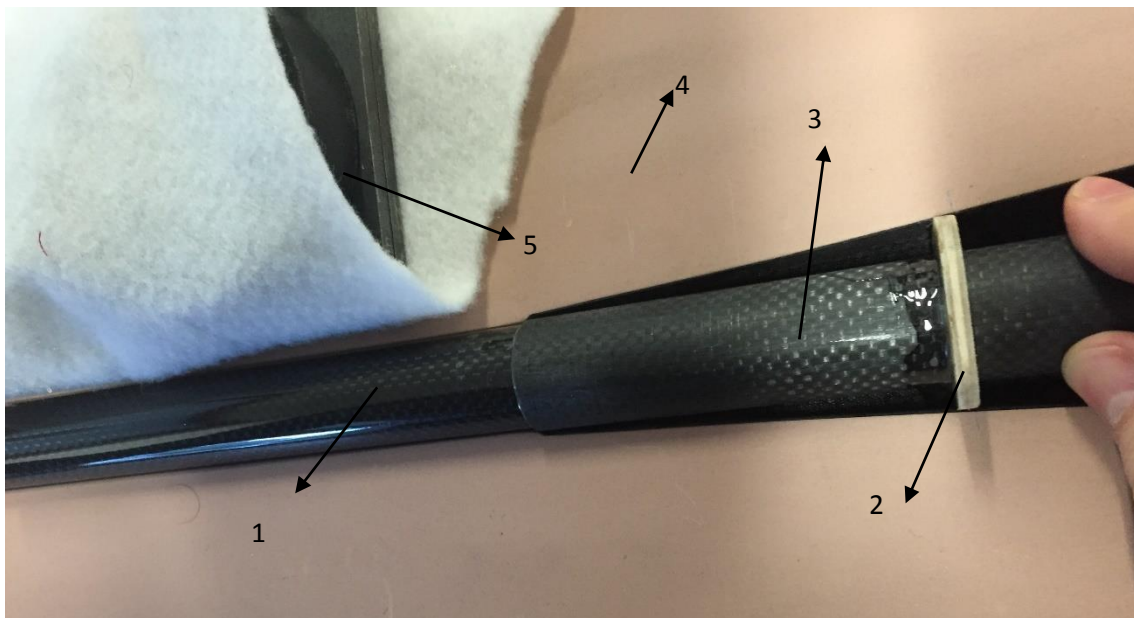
Fuselage tube in position (1-Tail tube; 2-Tube frame; 3-Fuselage tube; 4-Fuselage mould; 5-Lead weight).
